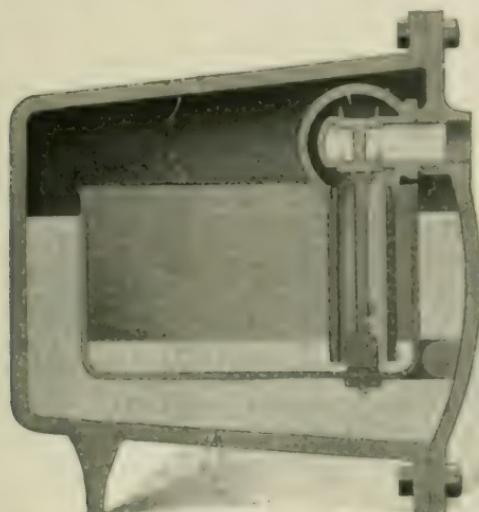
Steam trap: low-pressure type. By Kieley and Mueller.
